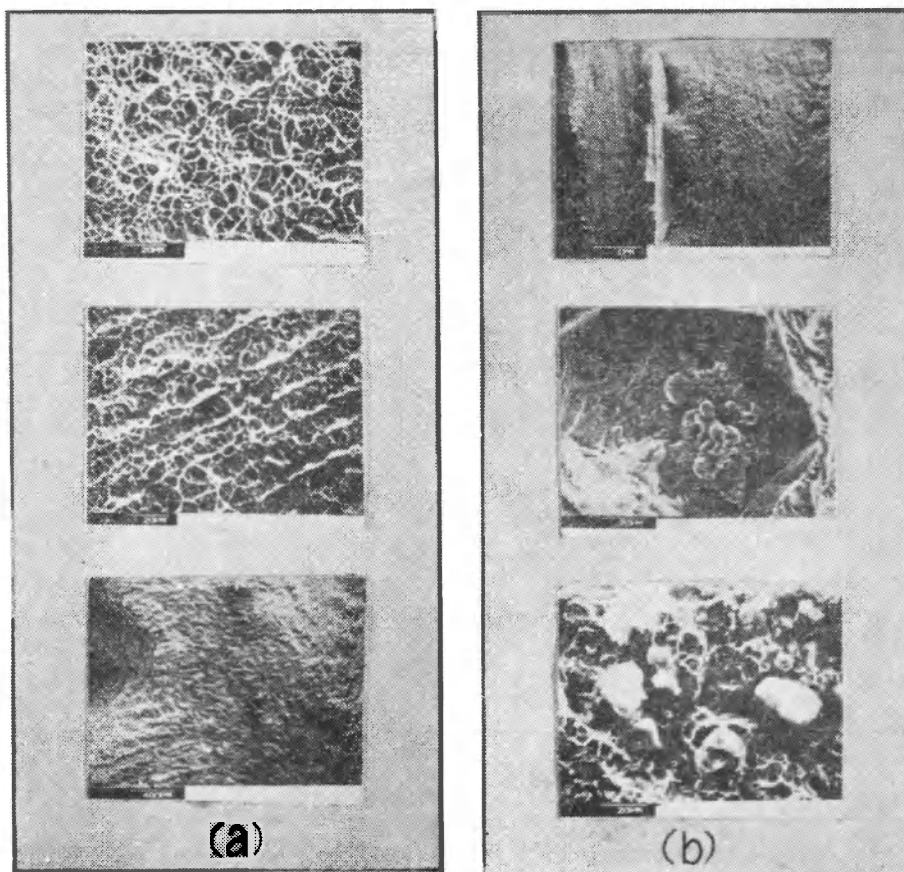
(a) Electron Fractographs showing transition from Weldmetal to HAZ. (b) Electron fractographs showing weld defects.
